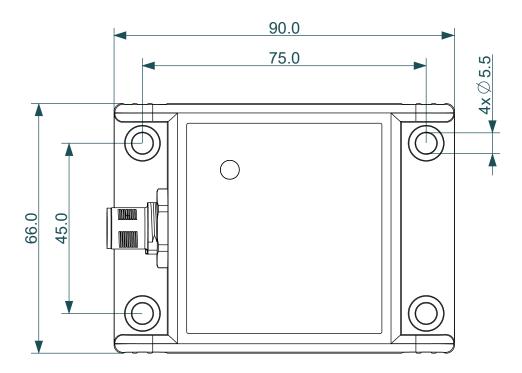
Dimensioned Sketch of big plastic housing (BP) (dimensions in mm)
